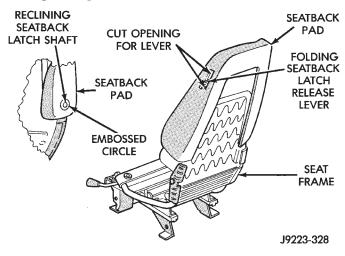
Seatback Pad Latch Lever/Shaft Openings
